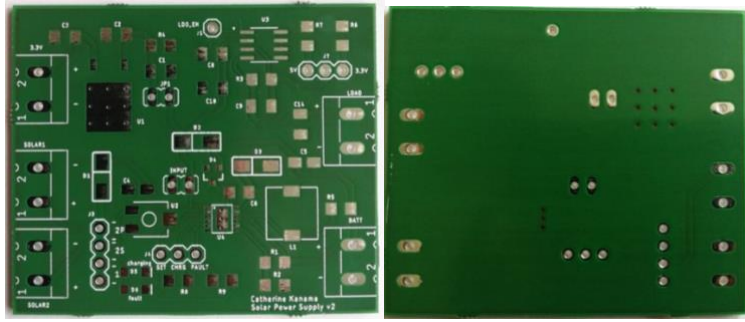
Top and bottom images of the solar power supply board (unsoldered)
